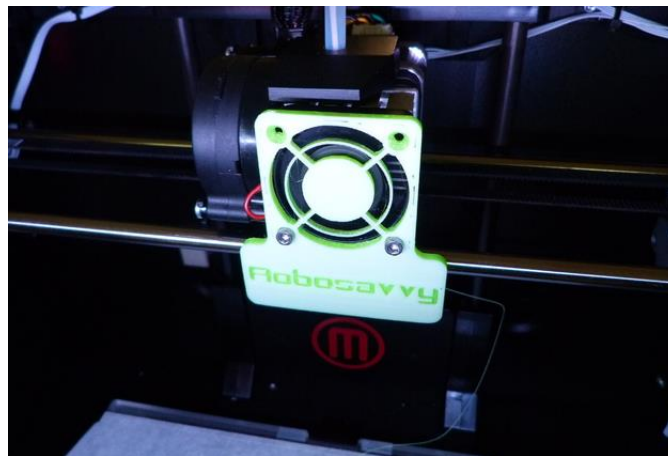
Front mounted printer head sweeper downloaded from thingiverse.com [13]
